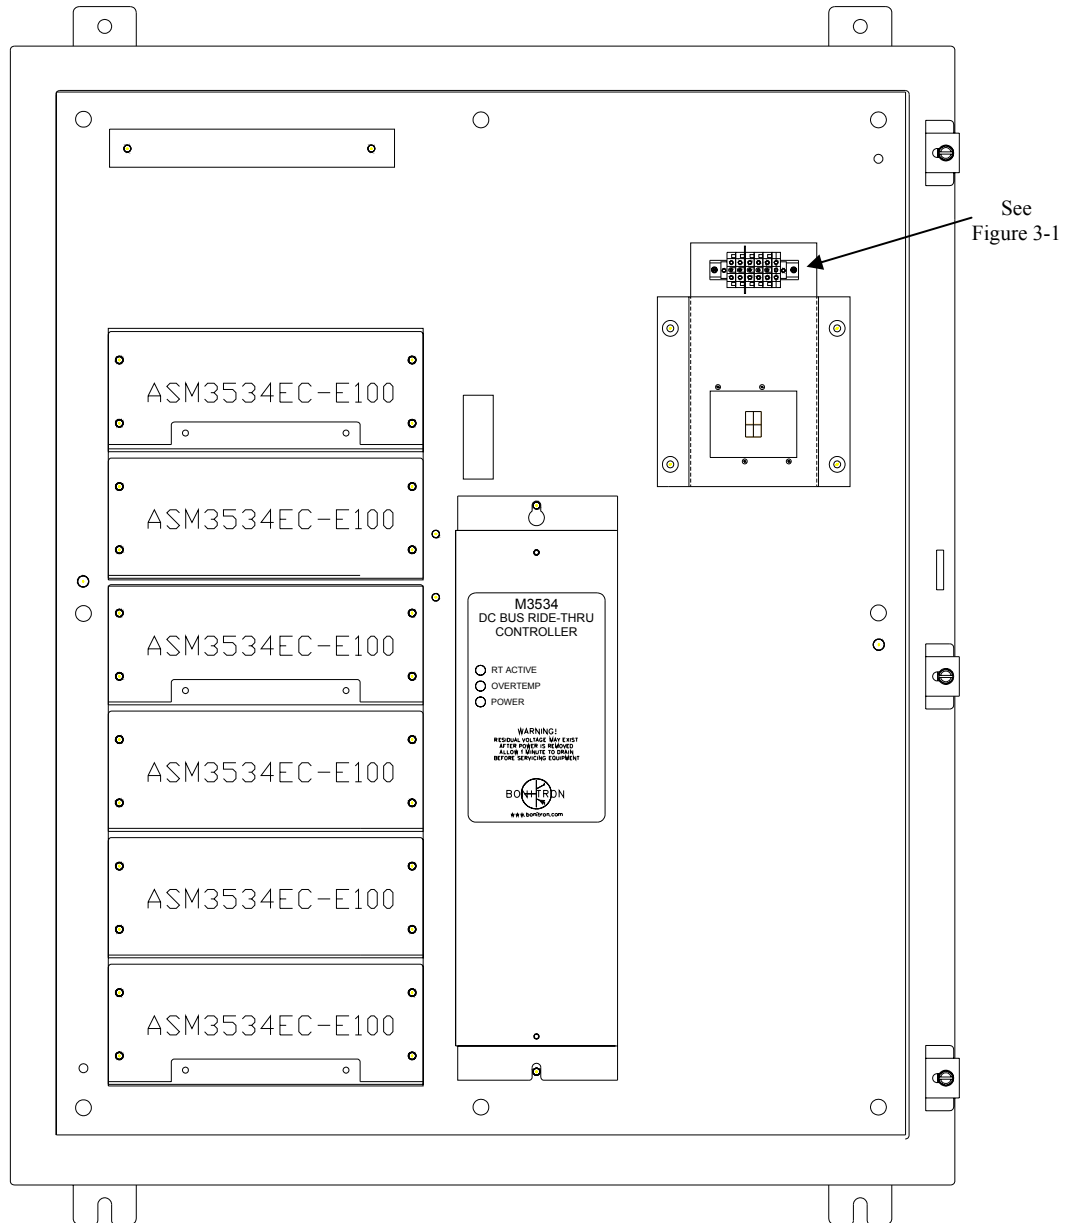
Typical M3534CR Ride-Thru System Internal Layout and Connections
